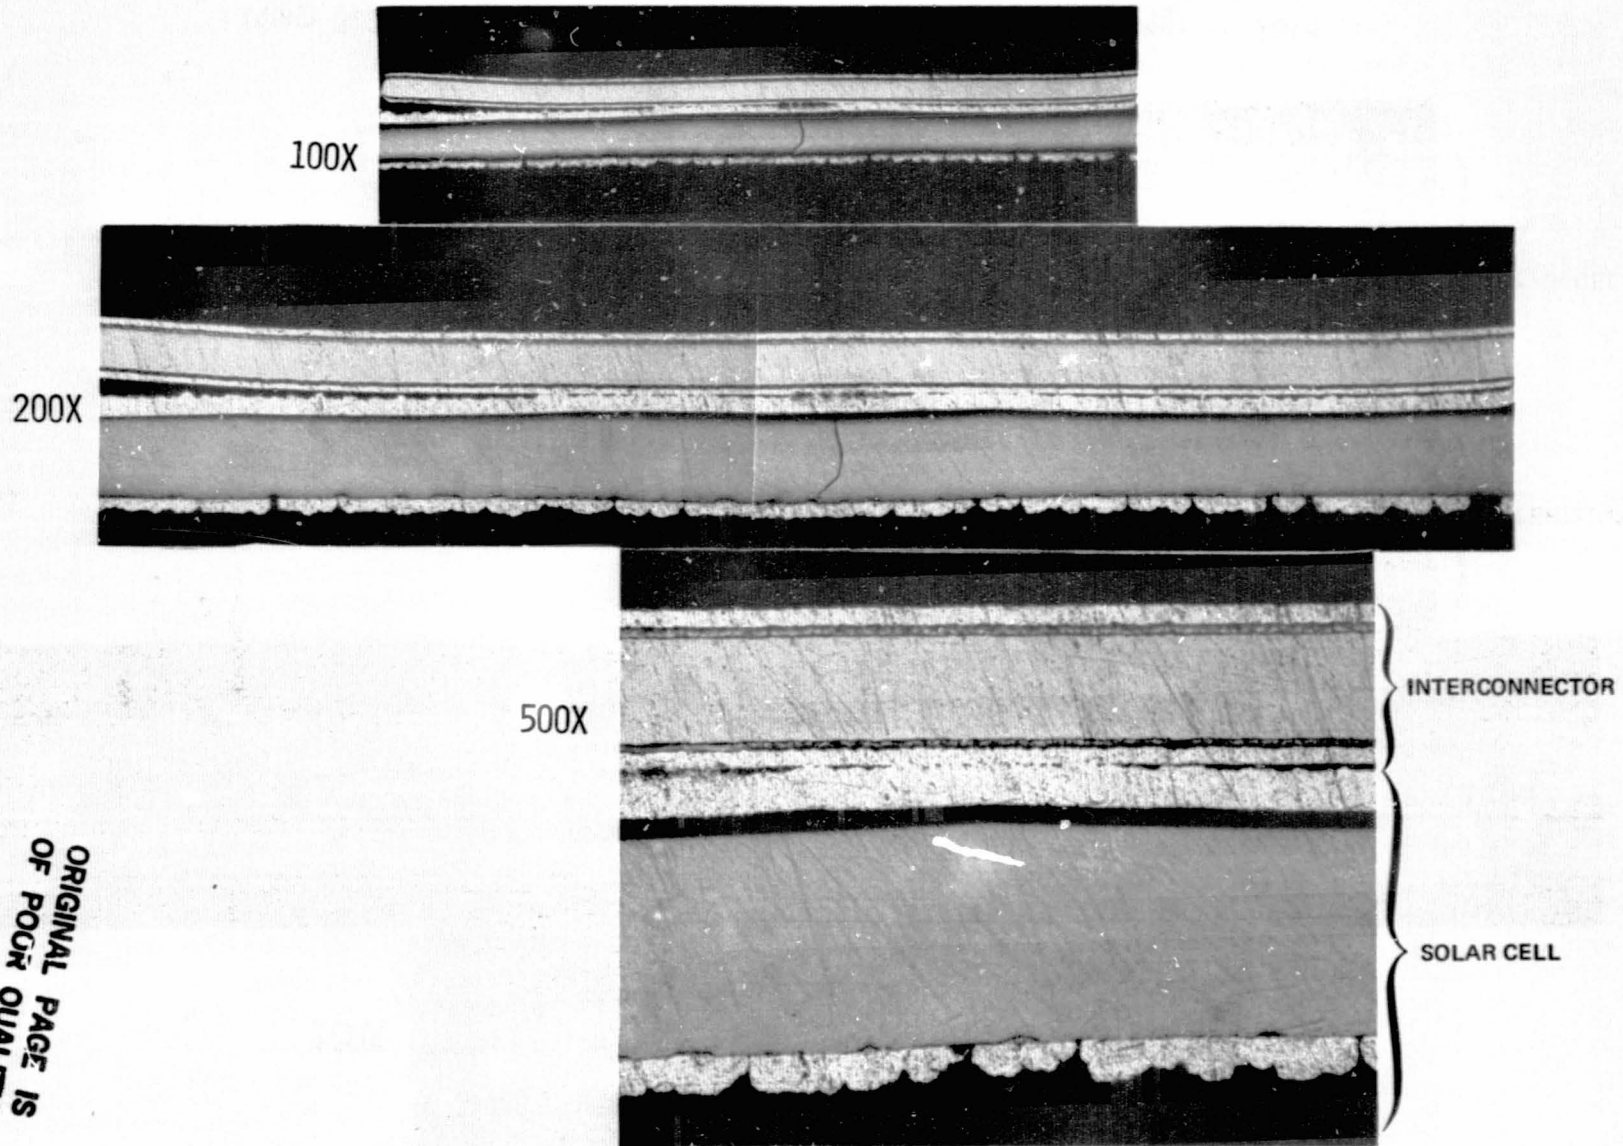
Joint No. 41, Cross Section of Cell Front Contact Weld
